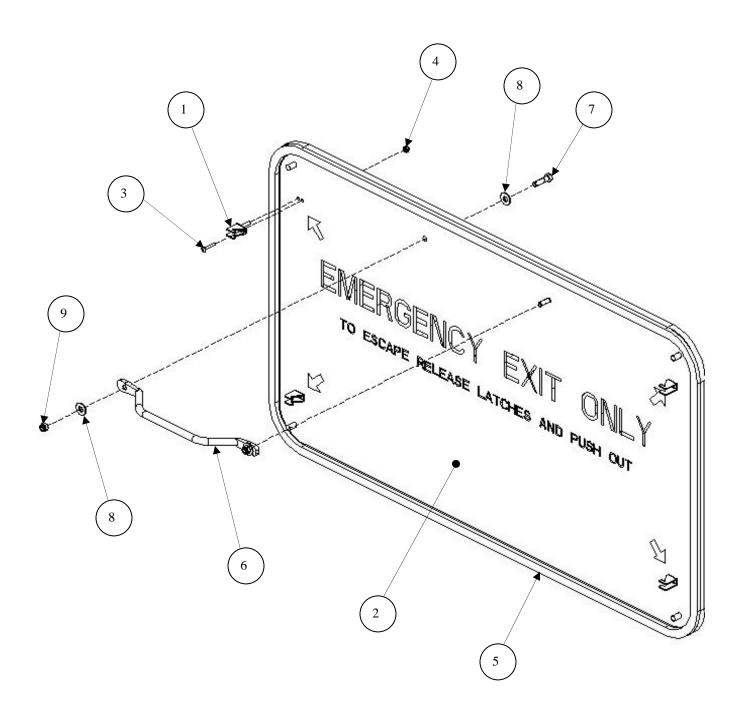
Escape Hatch Panel Pre-Assembly.
